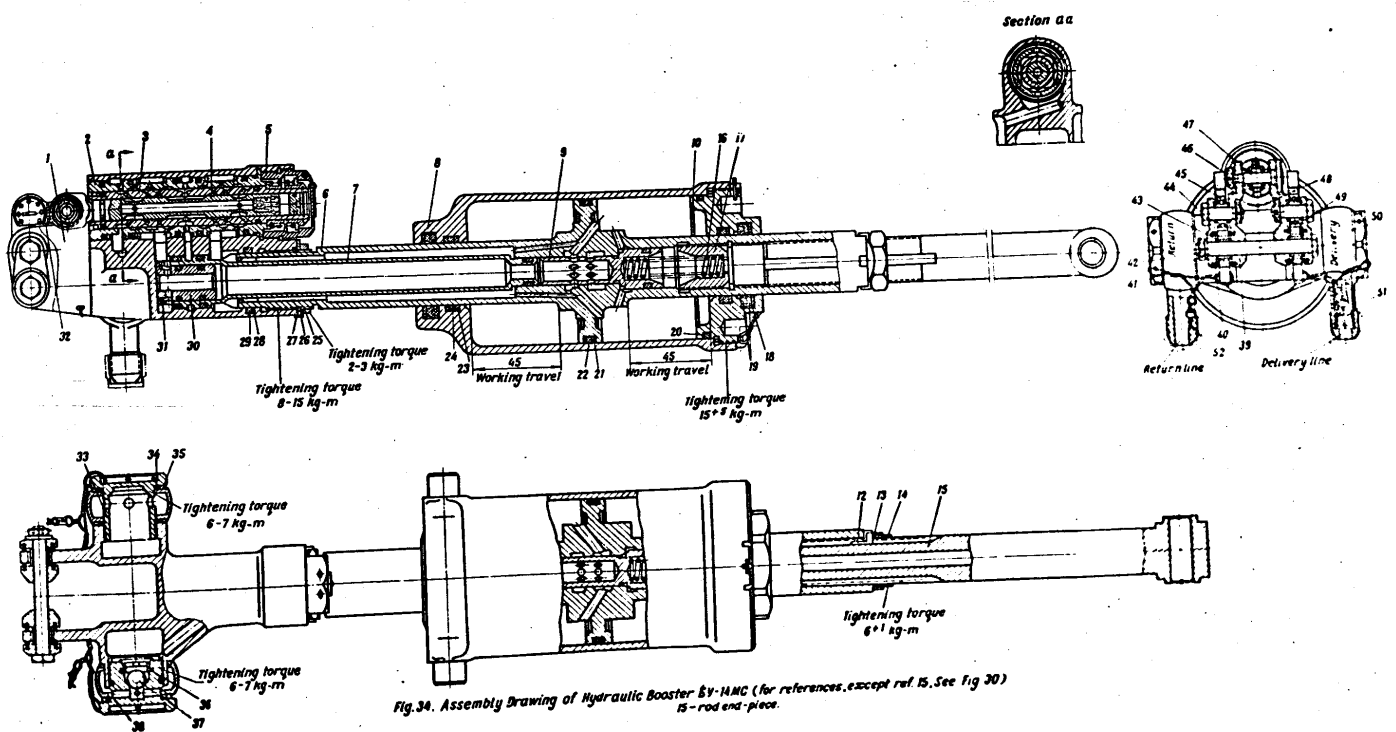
Hydraulic Booster 5V-14M. Assembly Drawing (for references, except ref. 15, see Fig. 30)
